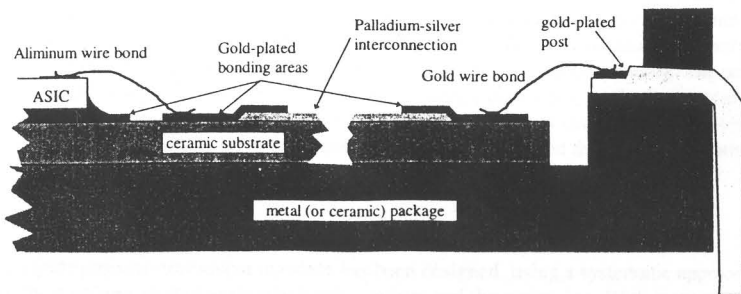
Cross-sectional view (not to scale) of a high-temperature package. Both aluminium and gold wire bonds will be present throughout the package.
